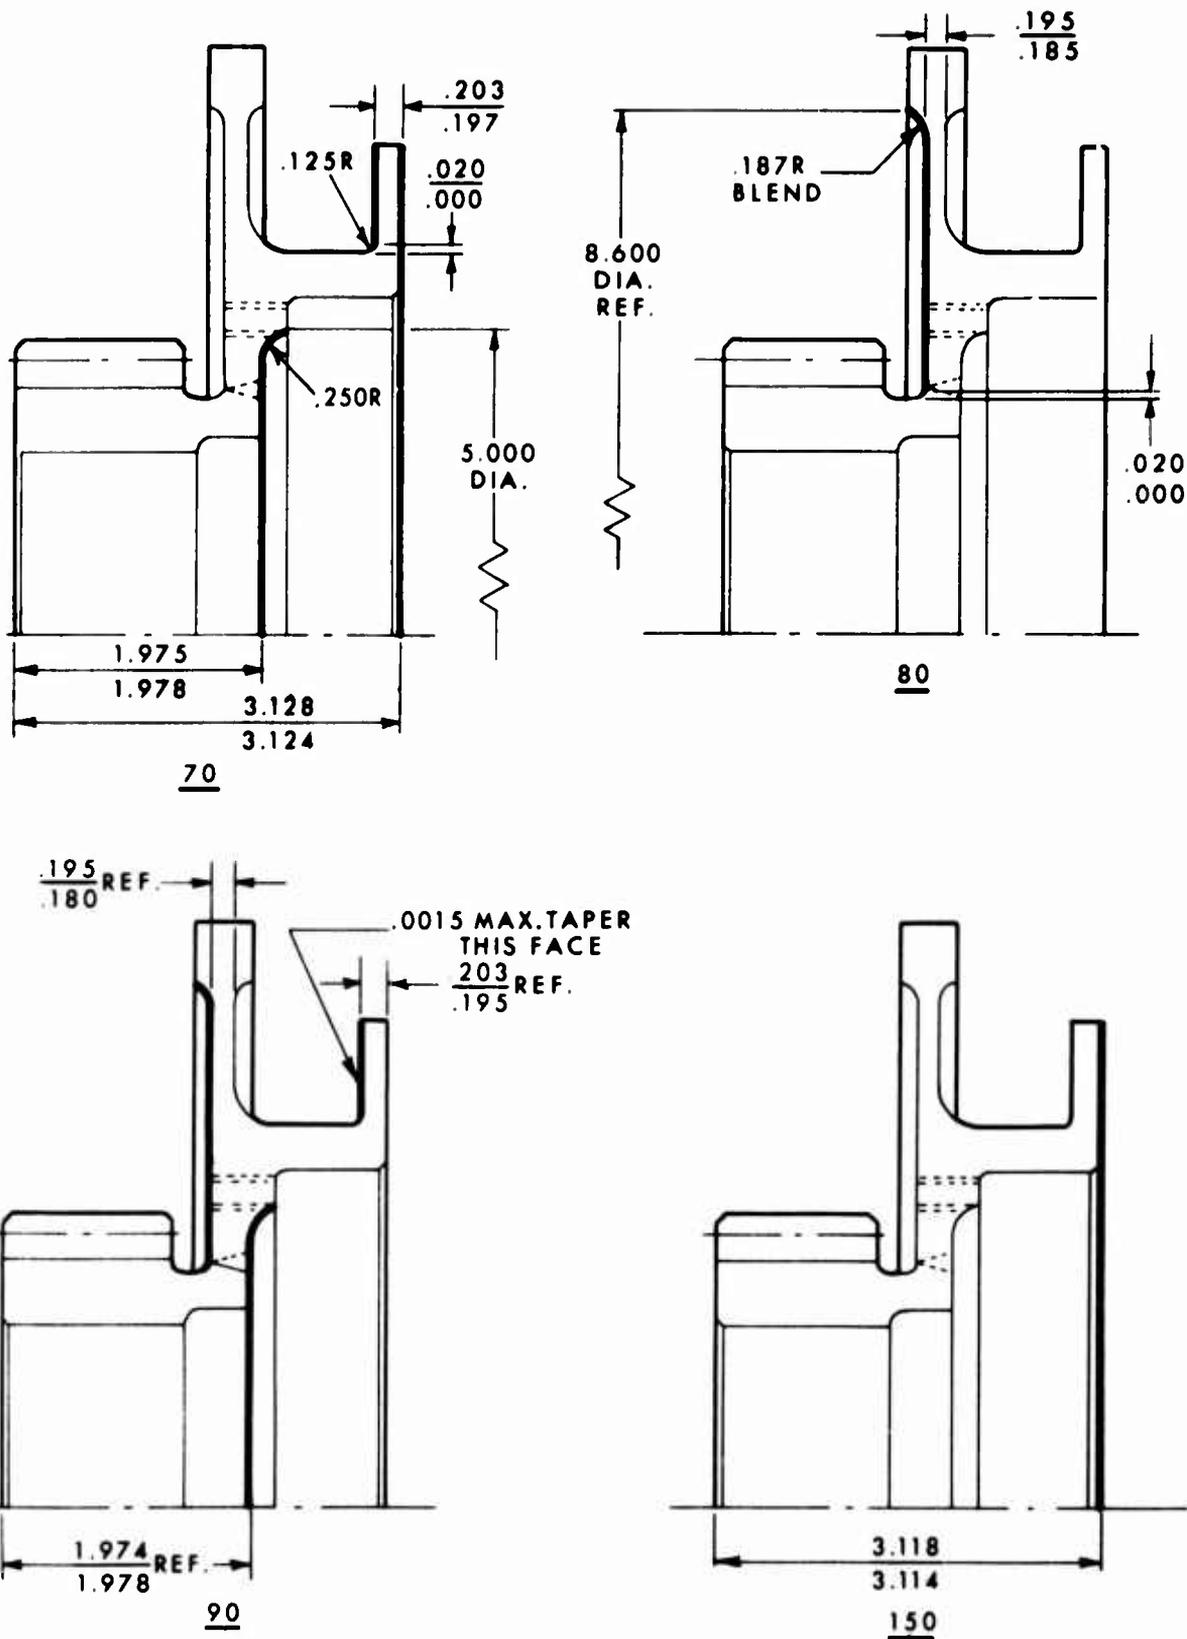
RG351-11278-045: Machine Operation Drawing (Sheet 1 of 2)
